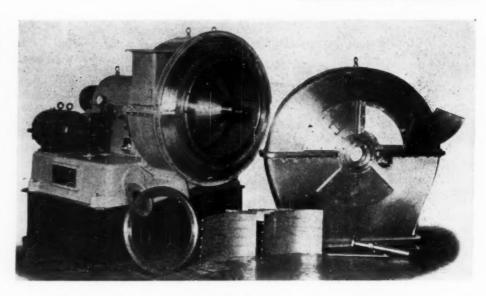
FRONT VIEW OF MACHINE SHOWING DRY HOUSING REMOVED TO SHOW SCREEN, FUNNEL, AND LEVELING RING
